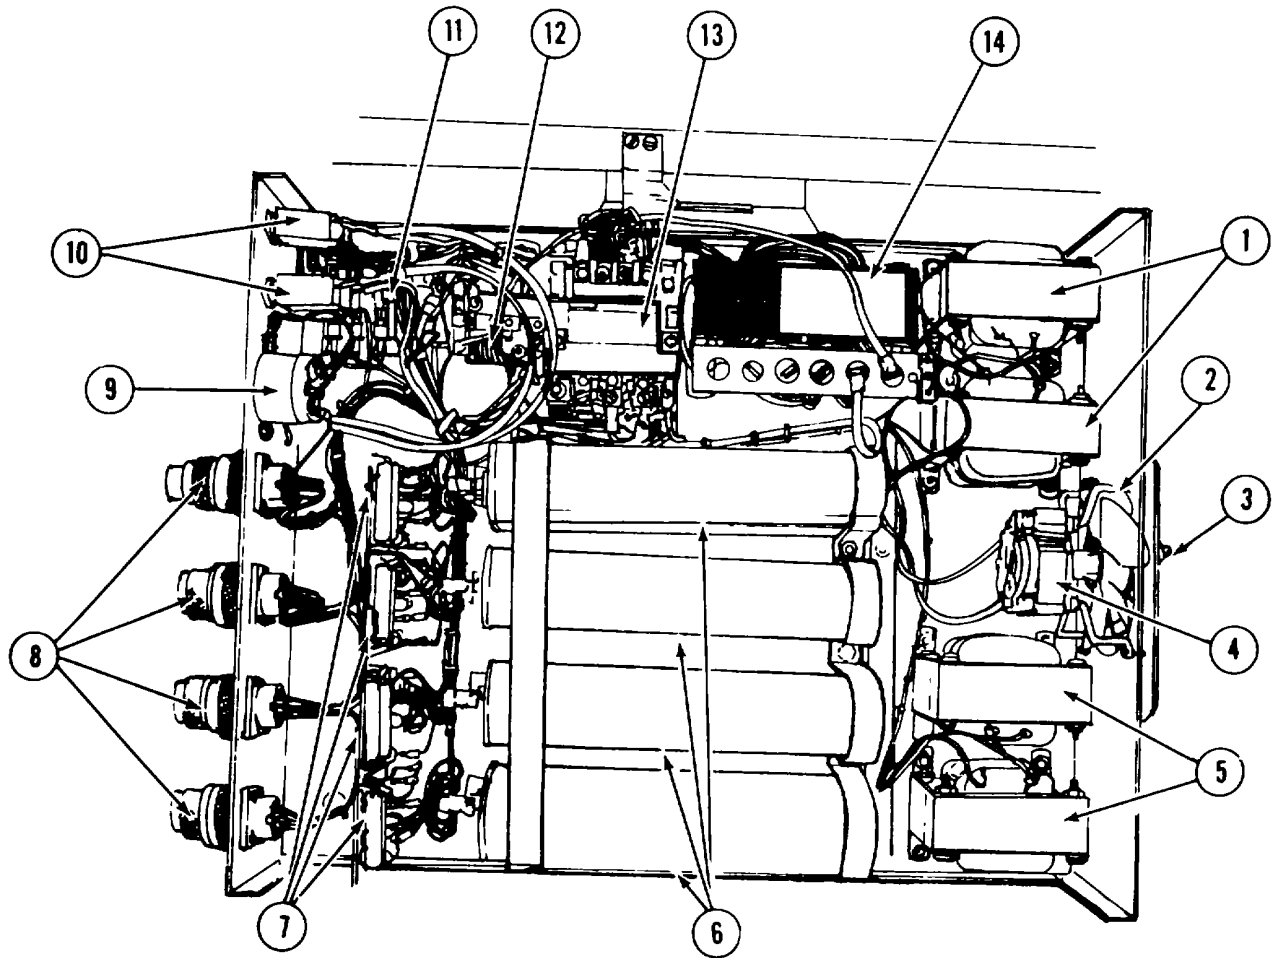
Lighting unit disassembly (Model 1969M).
